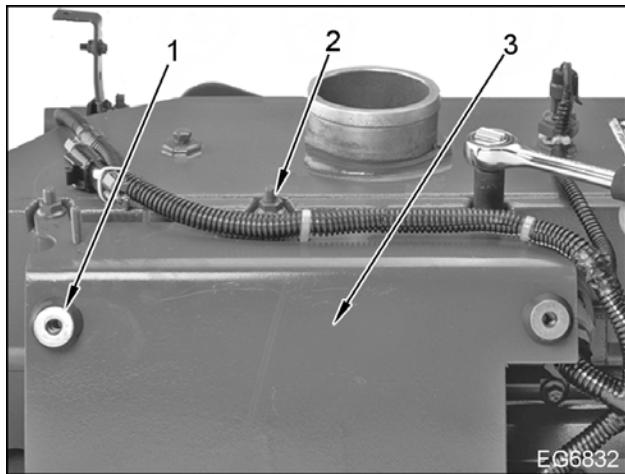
ECM bushings, pins and nuts (front mount ECM)
